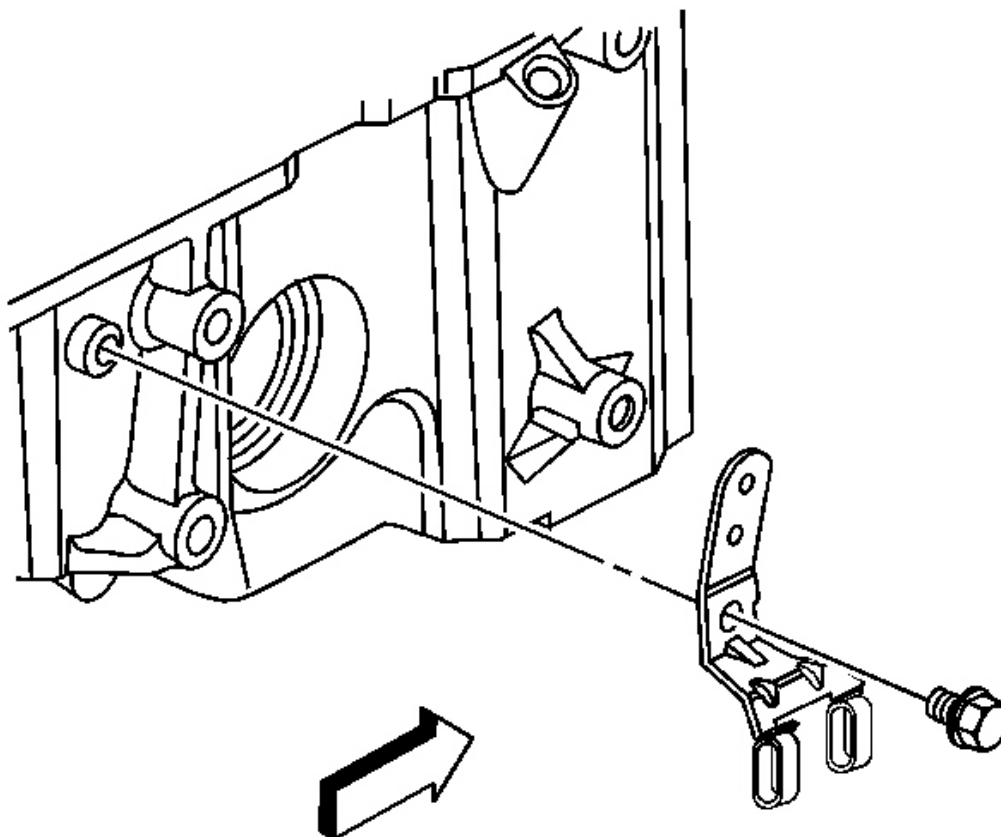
View Of Transmission Oil Cooler Line Retaining Bracket & Bolt
